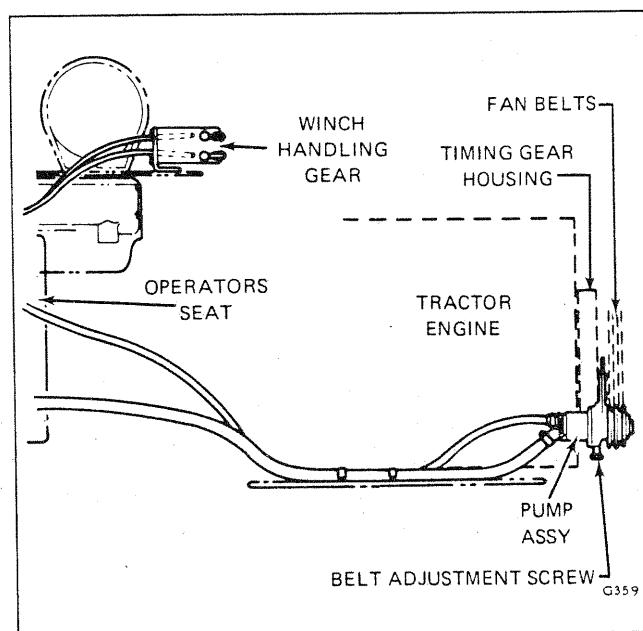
REMOVAL OF HYDRAULIC PUMP ASSEMBLY (977H TRAXCAVATOR SERIAL NUMBER 53A1 AND UP)
